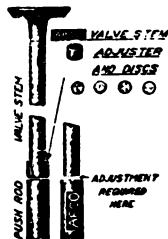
Valve clearance adjusters: When the space between the end of the push rod (fig. 44, chart 832) and the end of the valve stem is more than 1/2 inch (see page 785 this instruction) then a clicking noise is the result. As the Ford valve has no means of adjustment it is remedied by either installing new valves and \*\*push rods or using adjusters as shown in this illustration.
